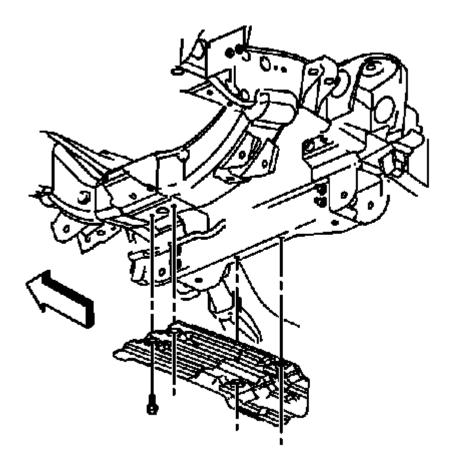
Identifying Oil Pan Skid Plate Courtesy of GENERAL MOTORS CORP.
